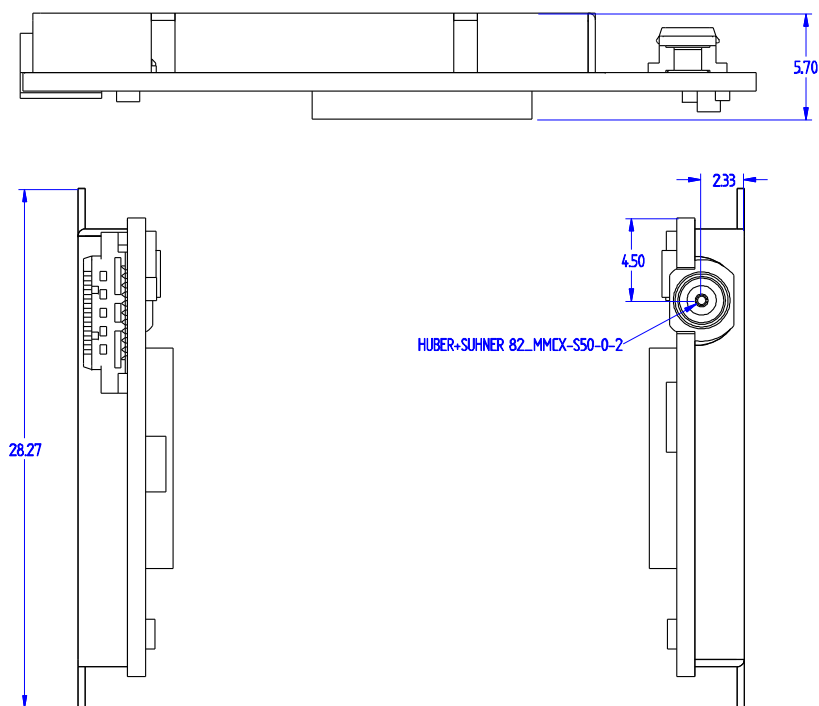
Quark R1230CB technical drawings: lateral views
